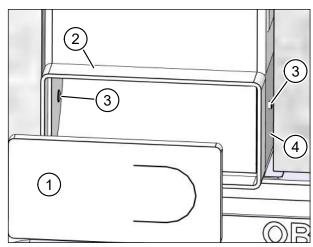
Riveting the flexible pipe connection to the fixing plate
